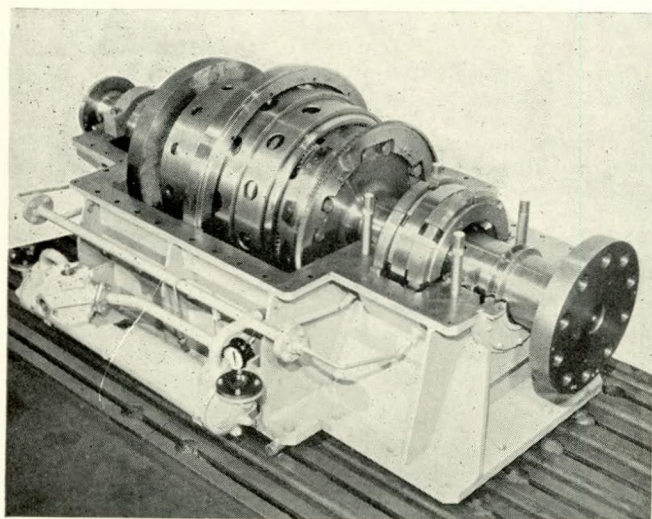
Double reduction gear used to reduce the speed of a Deltic from 1,630 r.p.m. to a propeller speed of 180 r.p.m.
